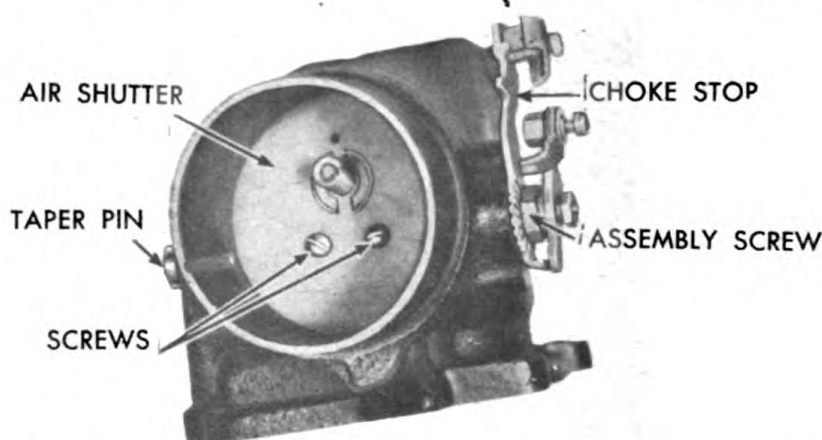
Carburetor Air Shutter Shaft & Lower Assy.
